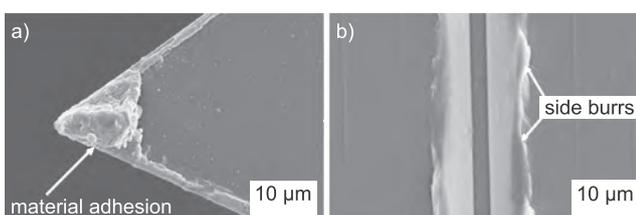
SEM photographs showing a) material adhesion on diamond tool and b) microgrooves with side burrs. [180].
